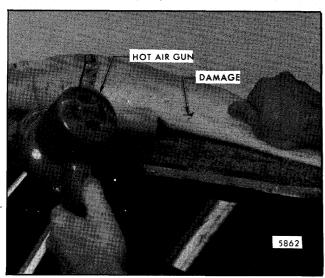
Separating Roof Cover From Foam Pad - Heat Application
